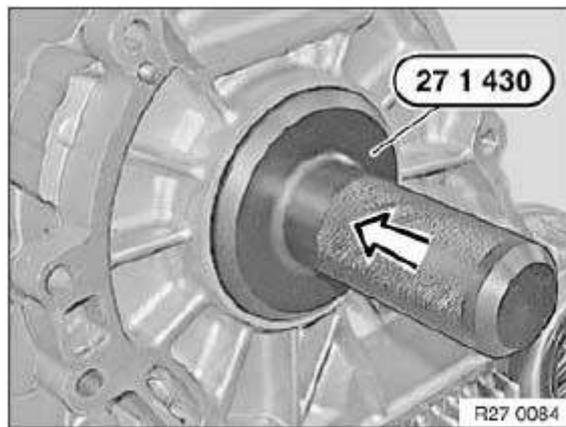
Installing Radial Shaft Seal With Special Tool (27 1 430)
